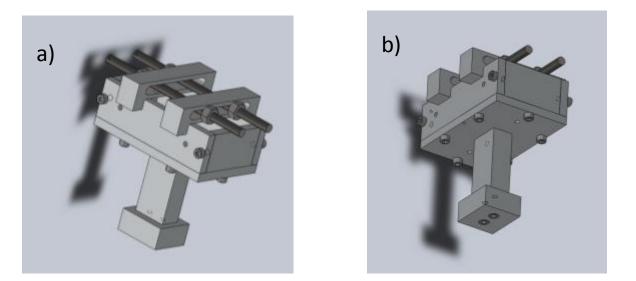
Final Design of Bilateral Testing Device a) view from top angle, b) view from bottom angle
